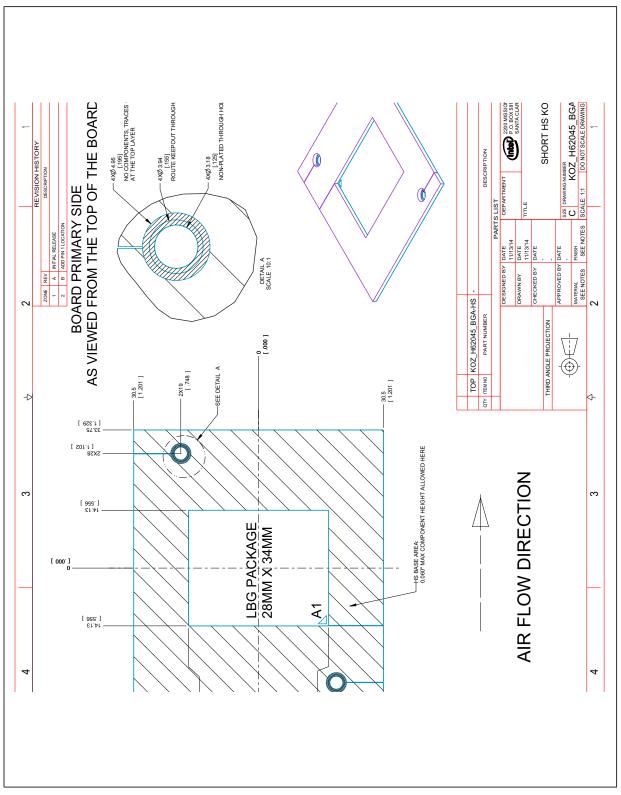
PCB Mechanical Keep-out Drawing - 2 Hole Heatsink (Sheet 1 of 2)
